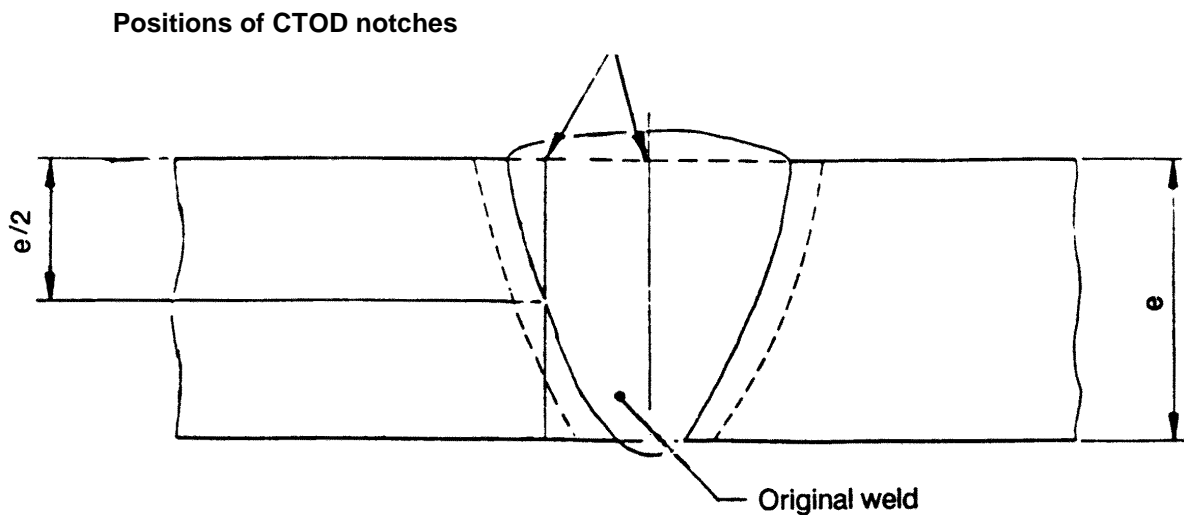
Position of crack tip opening displacement specimen notch for assessing partial penetration repair weld
